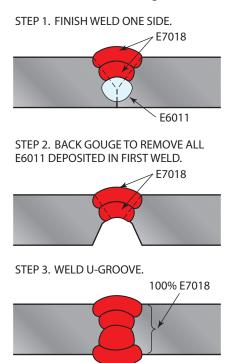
Back gouging to remove all weld metal used for the root pass or tacking.
